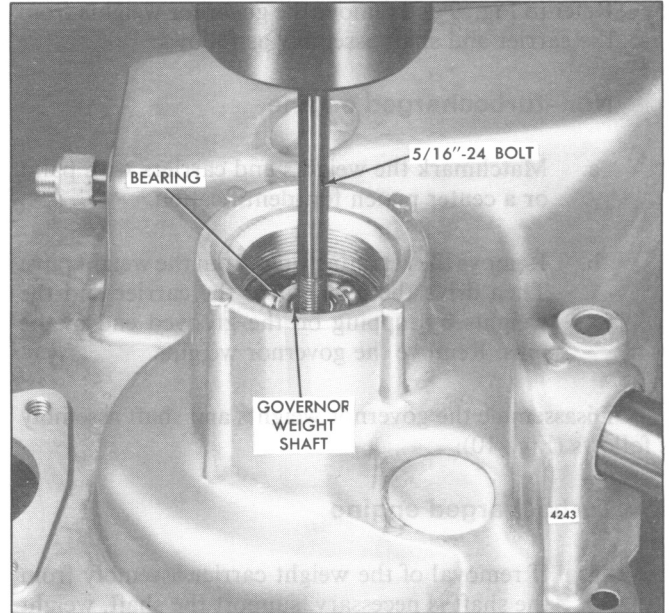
Removing Governor Weight Shaft Assembly from Governor Housing
